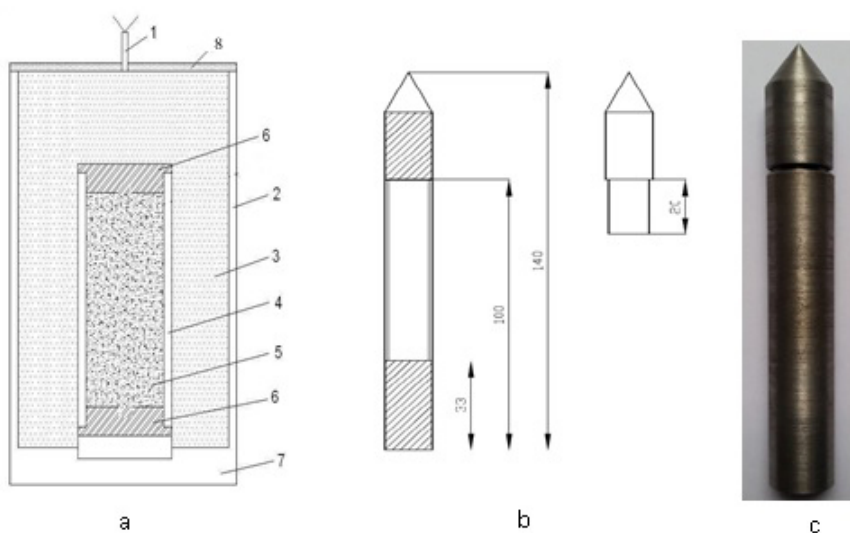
(a) Schematic view of assembly for fabrication of bulk rod: (1) electrical detonator; (2) container for explosive; (3) explosive; (4) steel tube (container); (5) reaction mixture; (6) steel plugs; (7) base table; (8) detonator holder. (b) Schematic of container (dimensions in mm). (c) Photograph of container.
